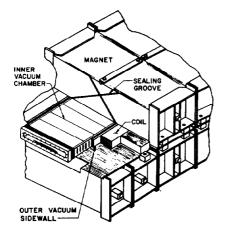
Fig. L. Cutaway of Ring Magnet Showing Double Vacuum Chamber.
